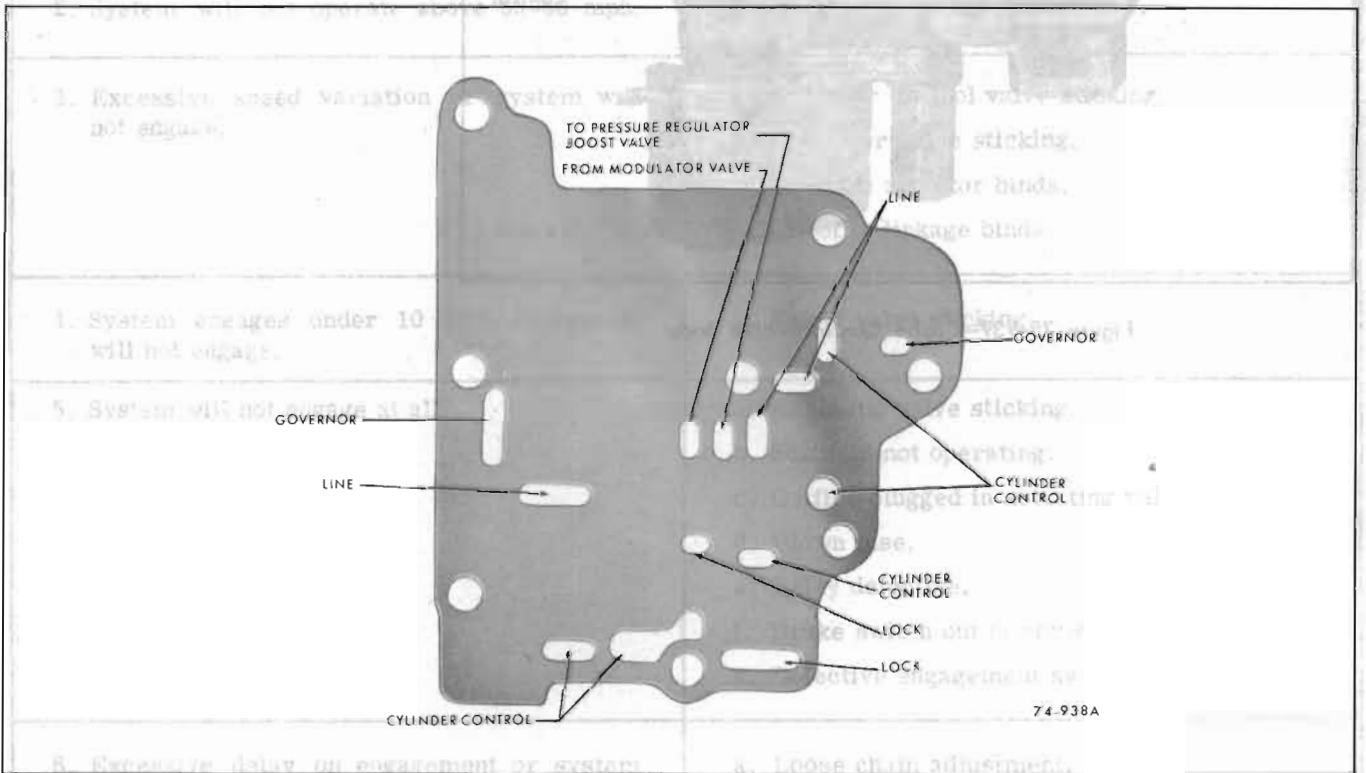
Oil Channel Support Plate to Valve Body Plate
